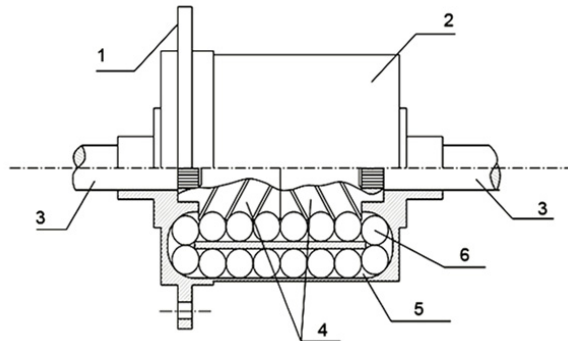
the SBDG design: 1) Final drive pinion flange, 2) Differential gear body, 3) Vehicle half-axes, 4) Half-axle elements, 5) Channel for balls passing, 6) Rolling bodies – balls.
